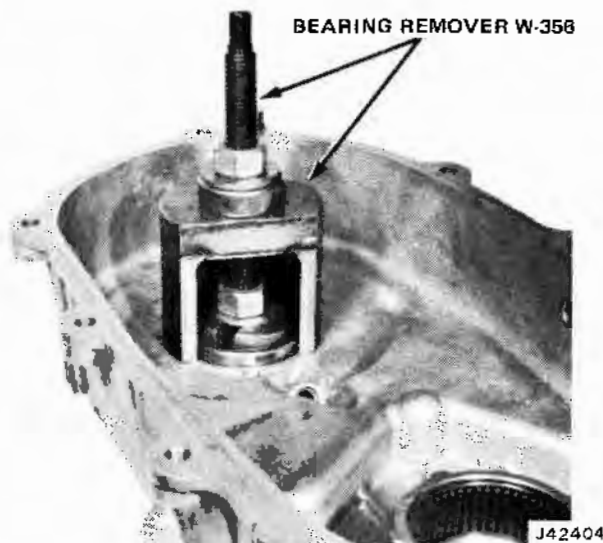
Removing Differential Front or Rear Needle Bearing
